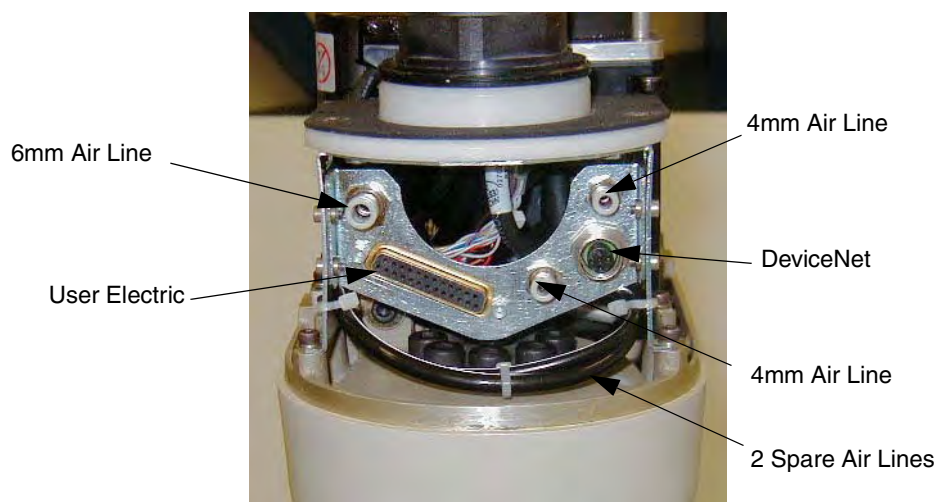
IP 65 Internal Connectors with Outer Link Cover Removed
